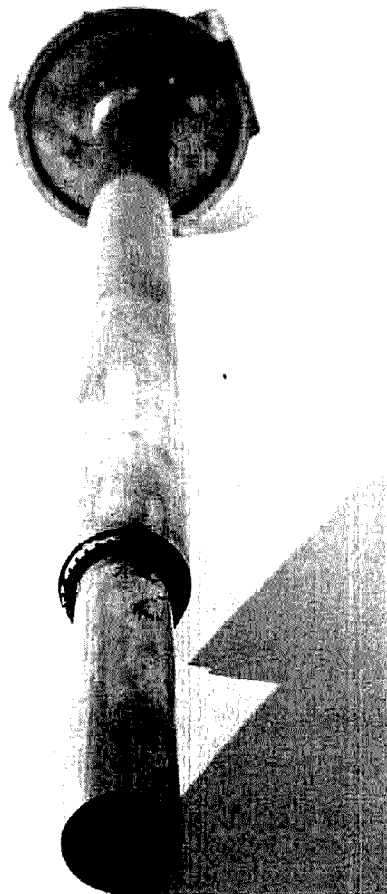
The top plate silver soldered to one end of the 1-3/8 inch (3.44 cm) O.D. copper tube and the finger stock silver soldered to the other end (foreground). Note how the finger stock firmly contacts the inner tube.
